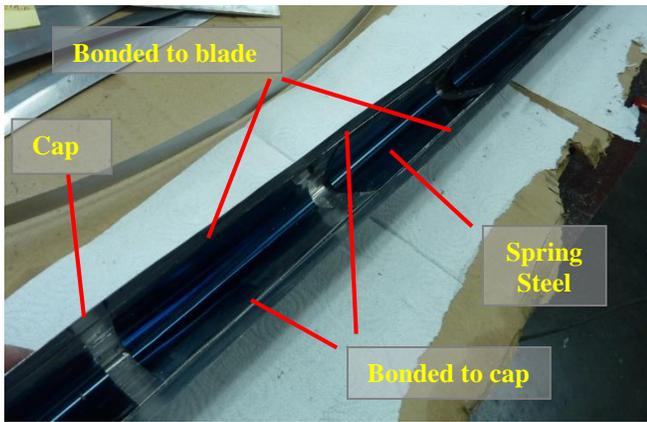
Schematic of alternating spring steel sheets bonded to the inner surface of the leading edge cap.
